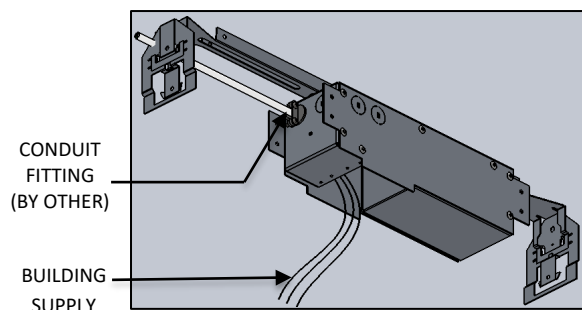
CONDUIT FITTING TO J-BOX ASSEMBLY
